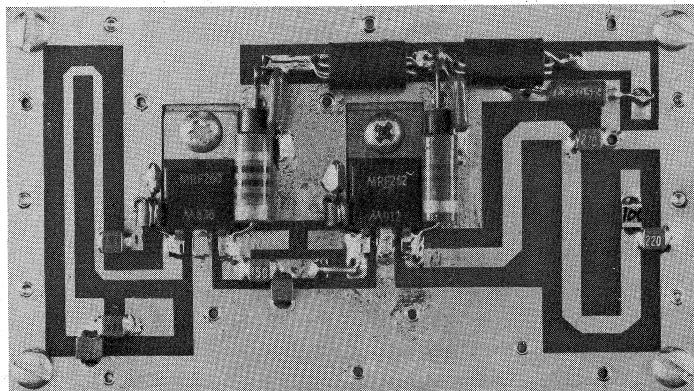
Engineering Models. A Common Board Layout is Used for Both Versions
